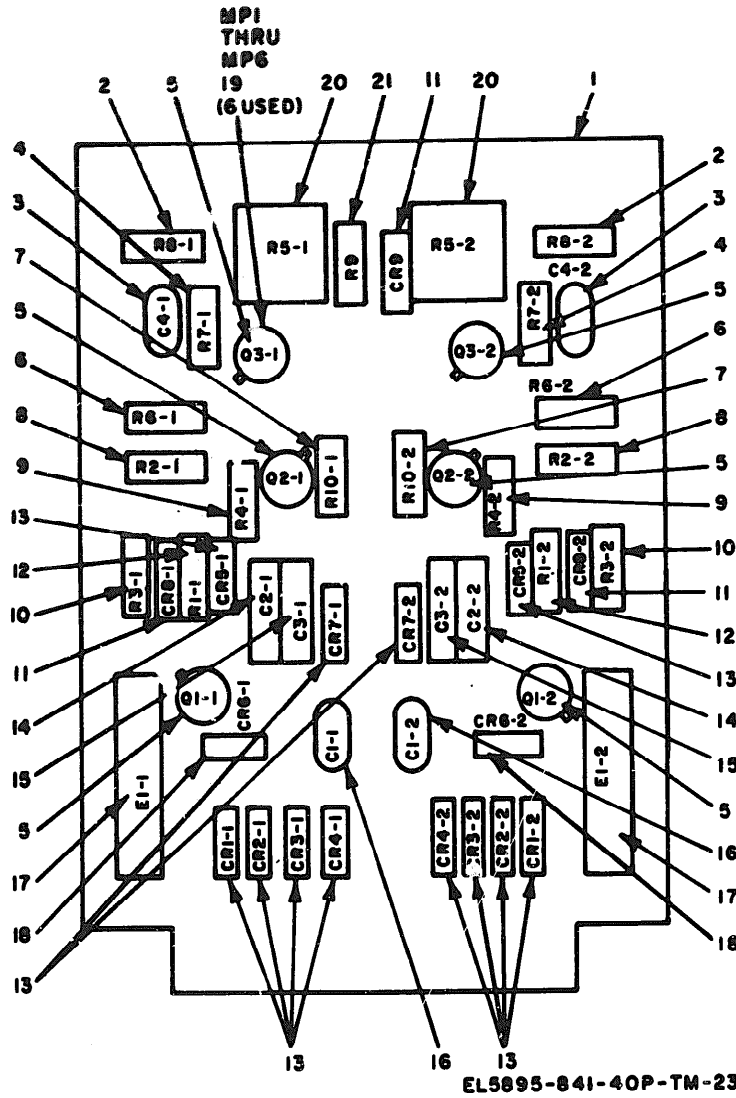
Circuit Card Assembly (SSS1 single-shot) 398-6607-11818.
